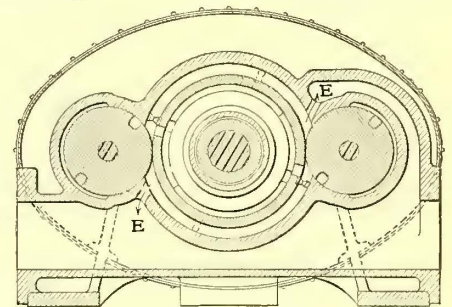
CROSS-SECTION OF WARREN ROTARY ENGINE
